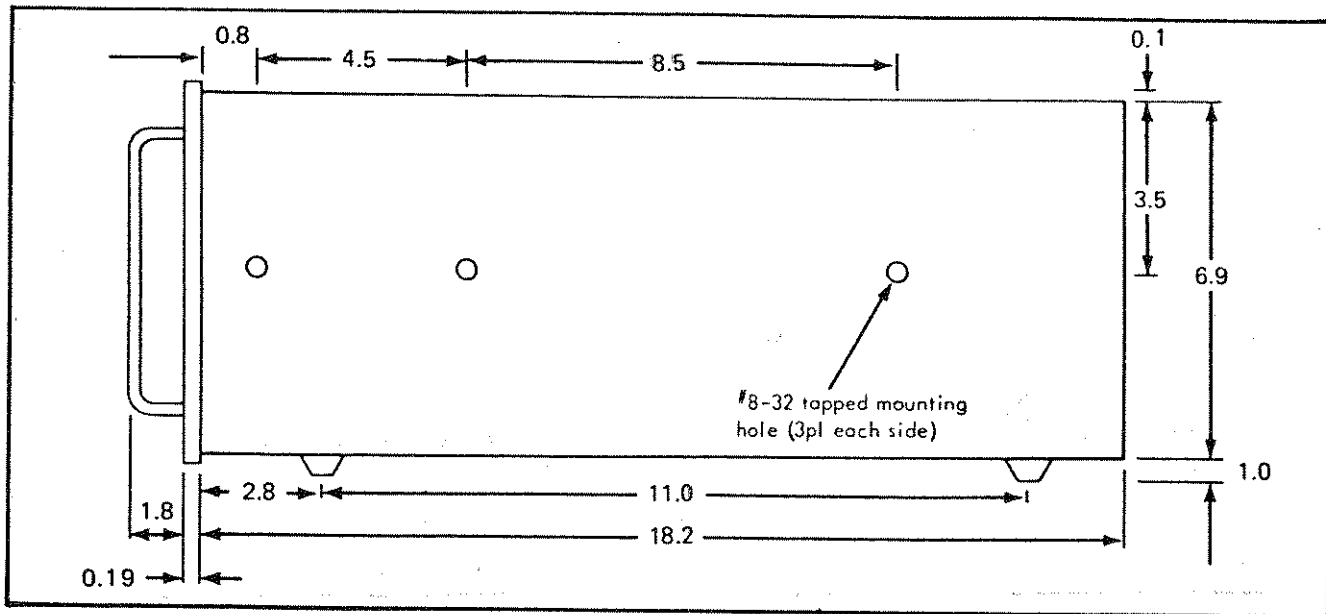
OUTLINE DRAWING(Sheet 2 of 2)
